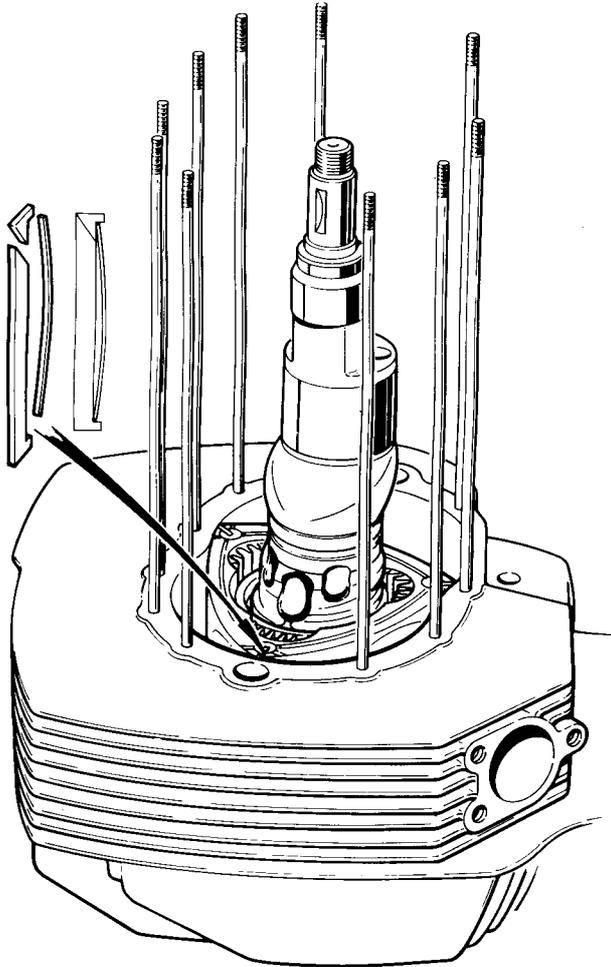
Fitting the apex seals, seal springs and apex seal corner pieces
